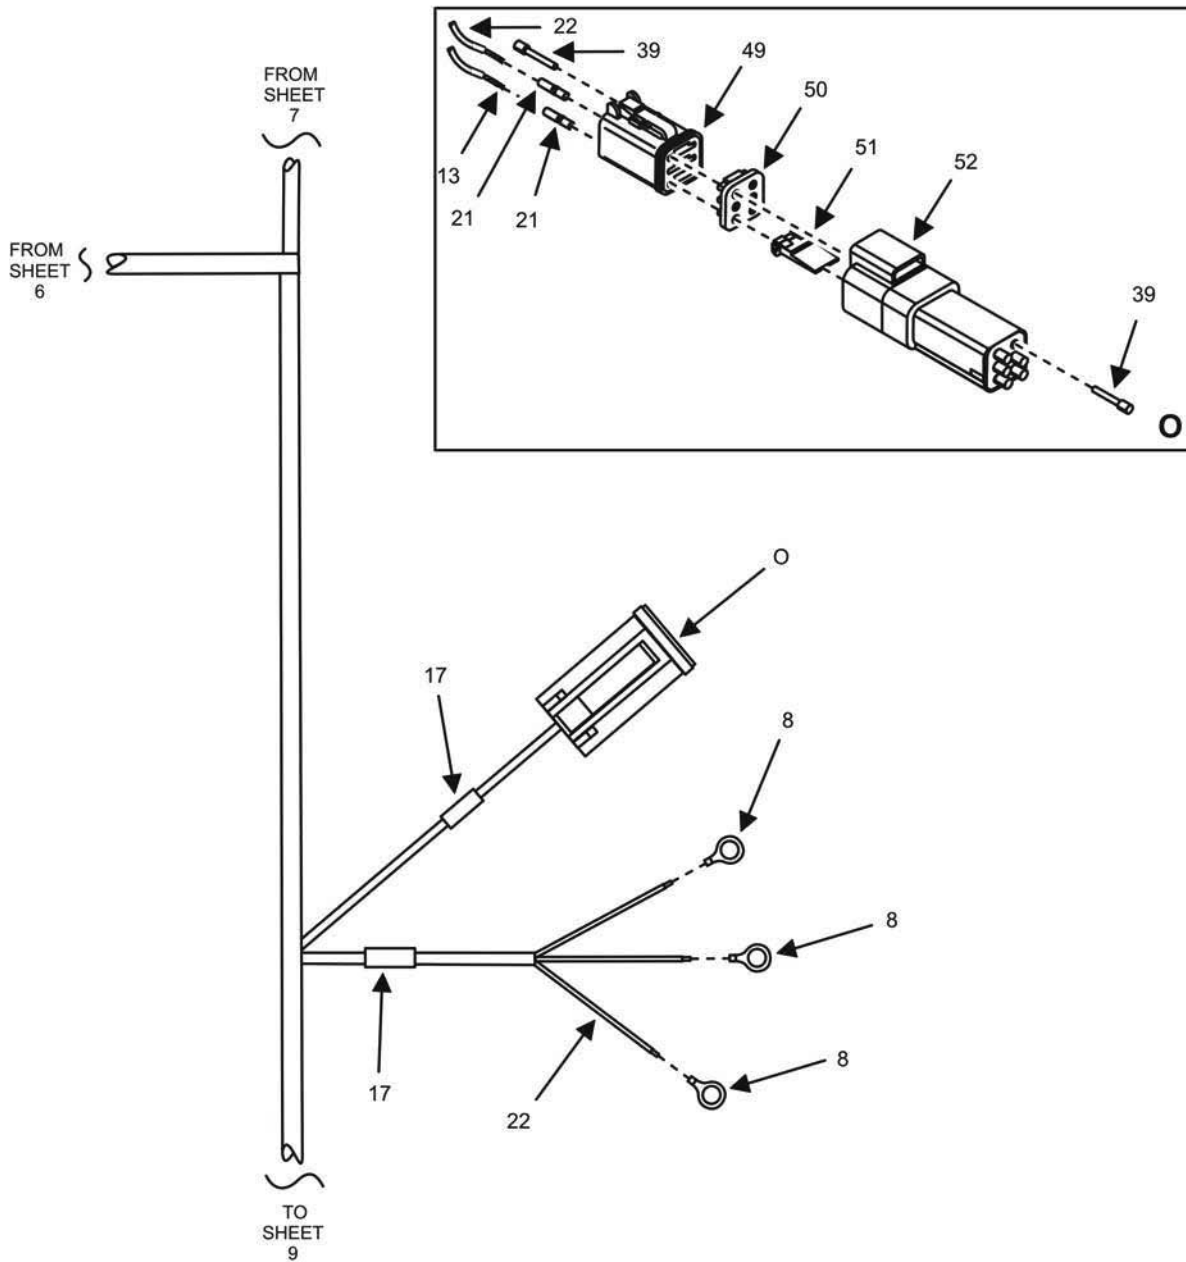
Engine Wiring Harness (Sheet 8 of 14).
